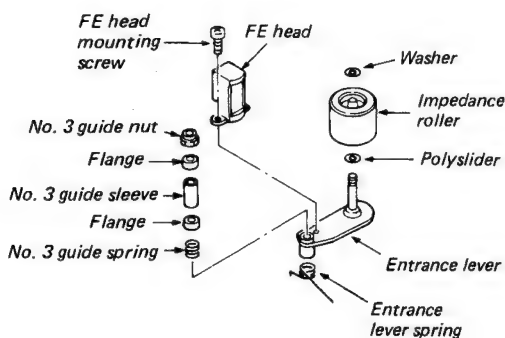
Replacement of No. 3 guide and FE head
